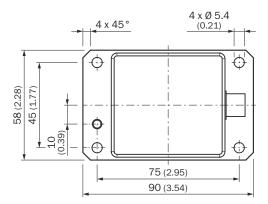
Dimensional drawing TMx88 (aluminum housing)
